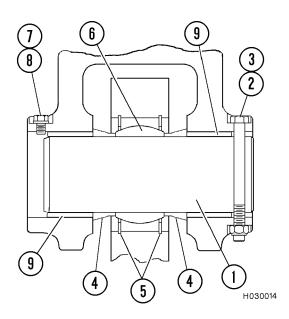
REAR SUSPENSION MOUNTING PIN (Typical, Top and Bottom)
